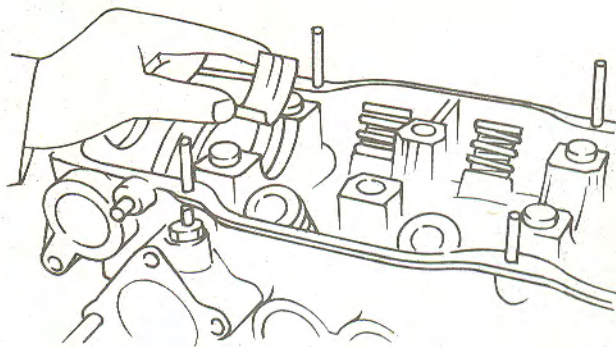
Inserting the bearing shells for the camshaft into the cylinder head. See also Section 1.4.5.1.
